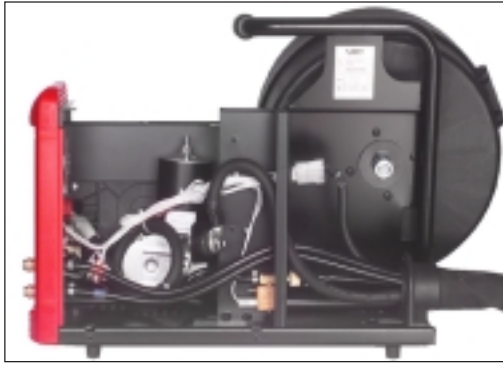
Fitting interconnecting hosepack to VR 3000 wirefeeder
